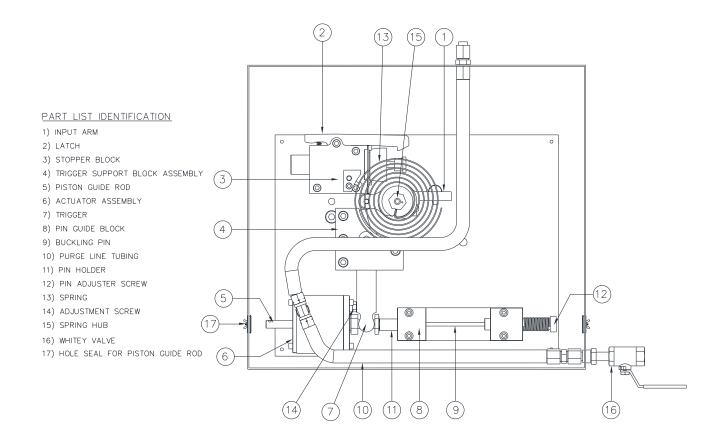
Mechanism Assembly (BPIV Closed) - clock spring
